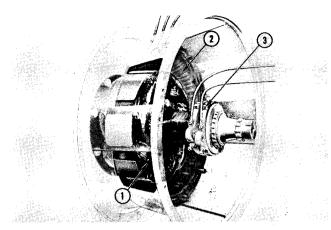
A.C. GENERATOR 1. Rotor 2. Stator 3. Brush Assembly
